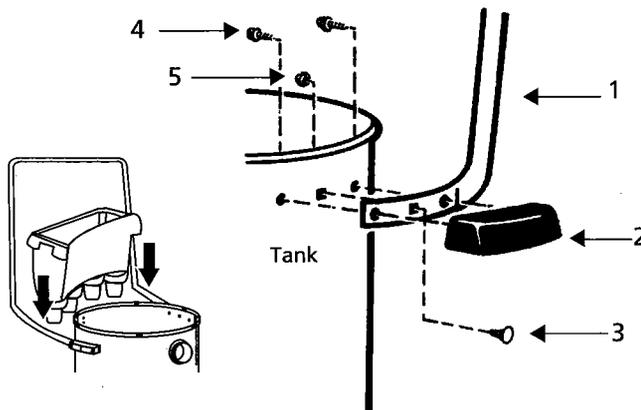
Repair Parts Illustration for Handle Assembly for Models 4TR11B thru 4TR13B
